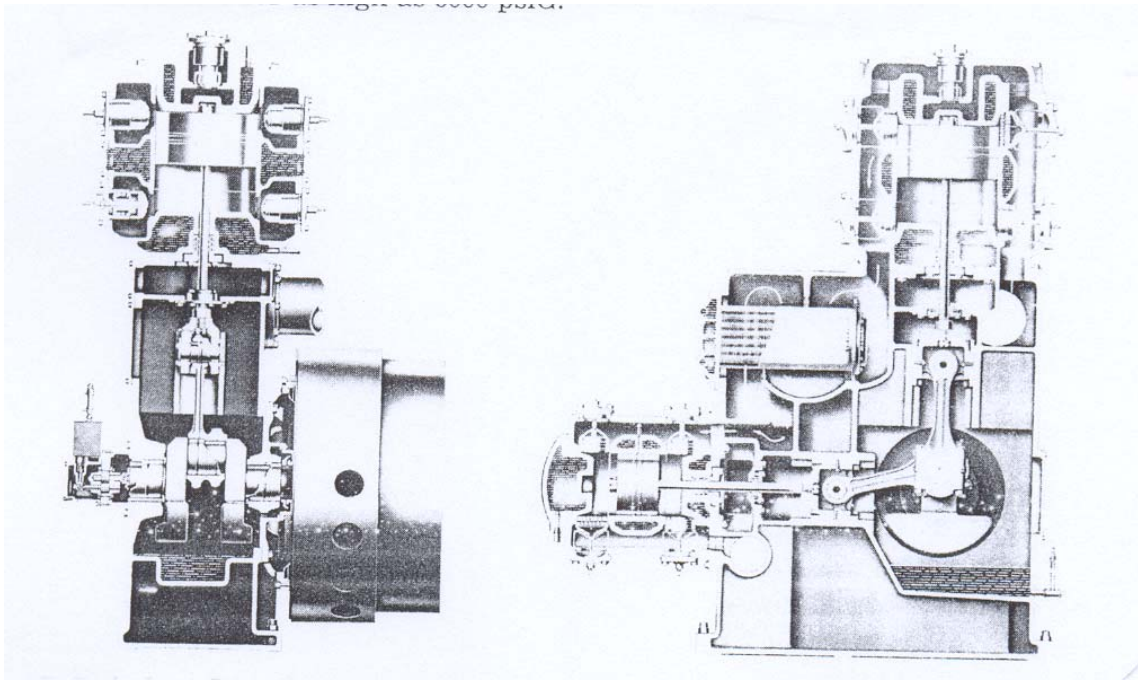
One type of angle compressor. Two-stage, heavy-duty, water-cooled, built-in finned tube intercooler. 75 to 1250 HP.
